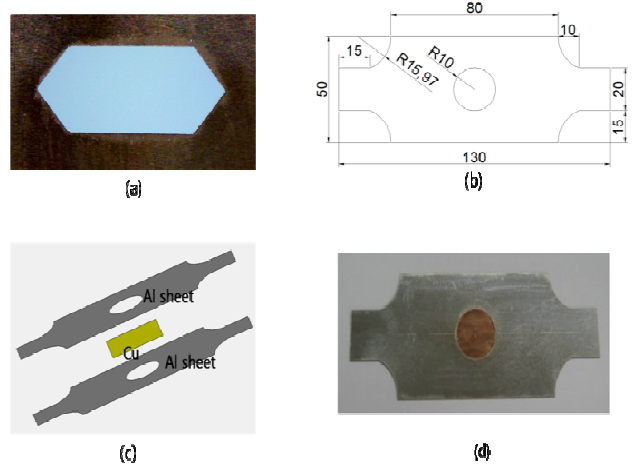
Tensile test specimens: (a) initial notch in a copper thin film, (b) the dimension of aluminum sheets, (c) a deal drawing of the specimen and (d) copper thin film attached to aluminum sheets
